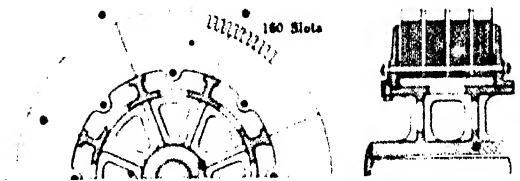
Segmental core discs fastened by bolts to flanges.
